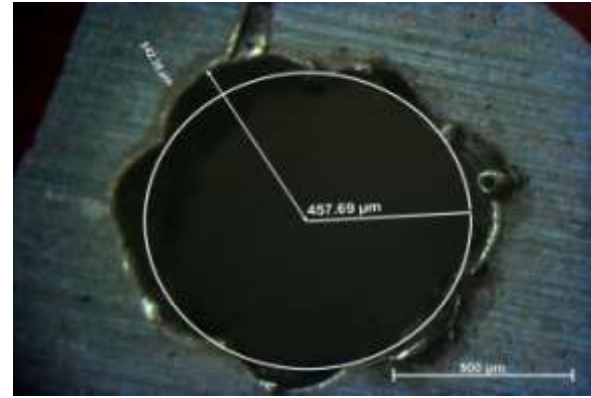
(b) Bottom side of micro hole using 0.9 mm copper tool
